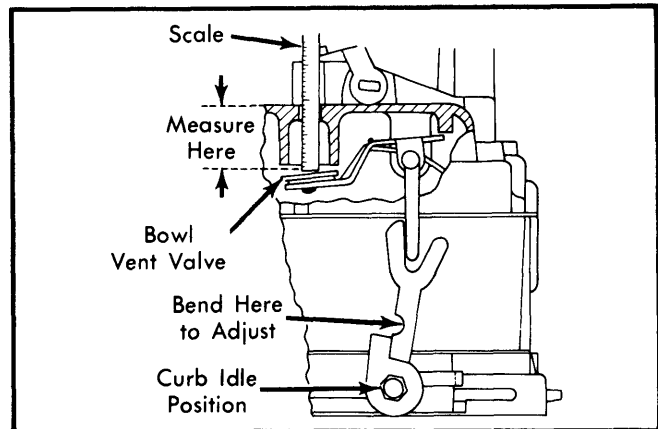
Adjusting Mechanical Bowl Vent Valve (International Harvester Models Only)
